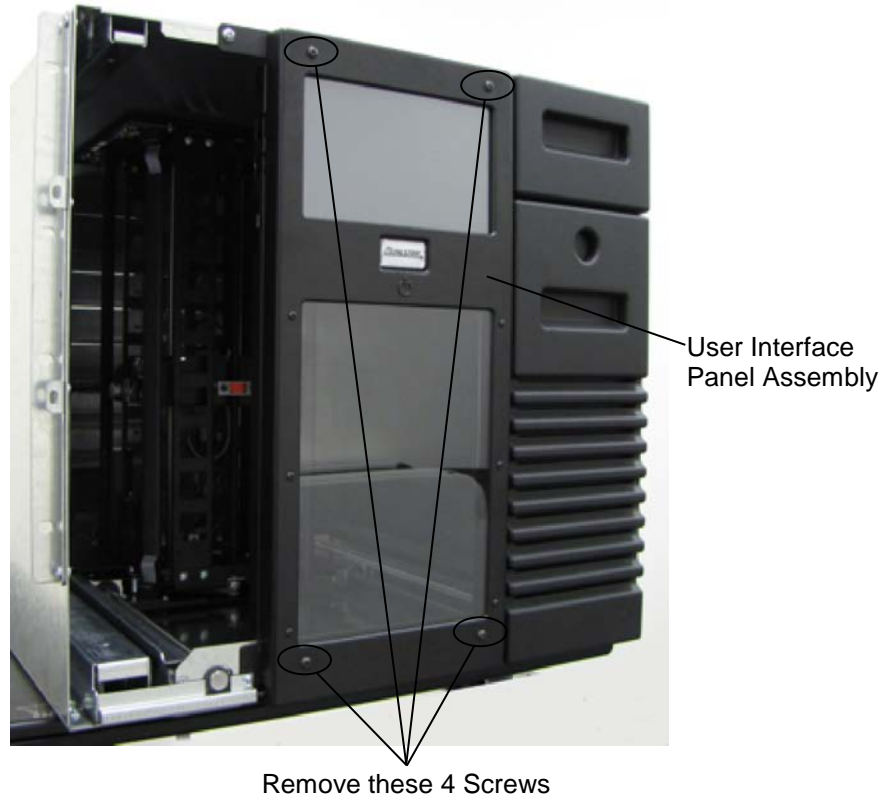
Screws shown securing the face of the User Interface Panel Assembly
